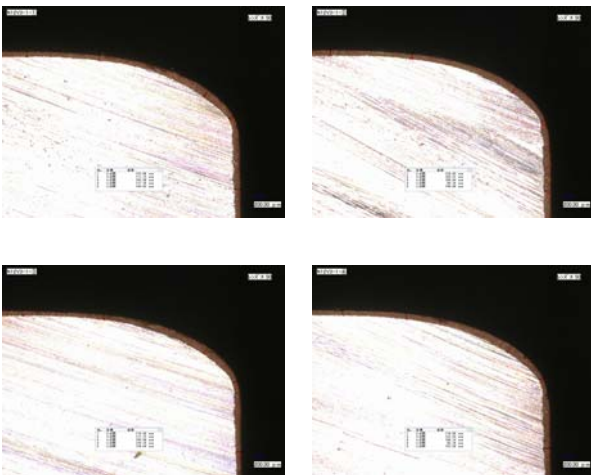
Examples of cross-section views of EPPAC specimens (specimen B12V3-1, Up: kerf, Right: front face).
